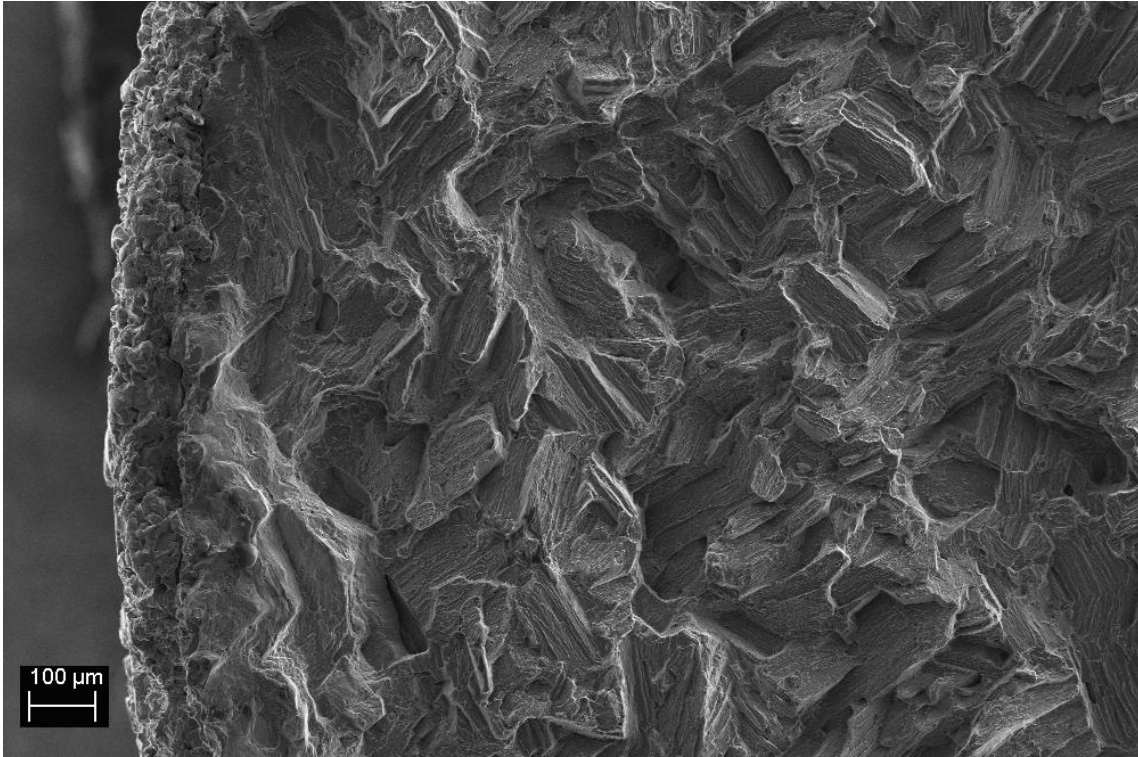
shows the fracture surface of stress relieved/coated specimen that has been tested under nominal stress of 188 MPa. As Figure 73a presents, the crack initiation region is extended from the middle right to middle bottom of the image. Coating layer delamination is visible in the center of this region. Figure 73b shows a closer image of this area. The center of crack nucleation area makes the angle of 45° to the thickness direction. Except for the crack initiation point, no coating layer delamination is observed around the fracture surface of the specimen that proves strong bonding between coating particles and the specimen surface. Figure 73c shows the coating layer and the fracture surface.
